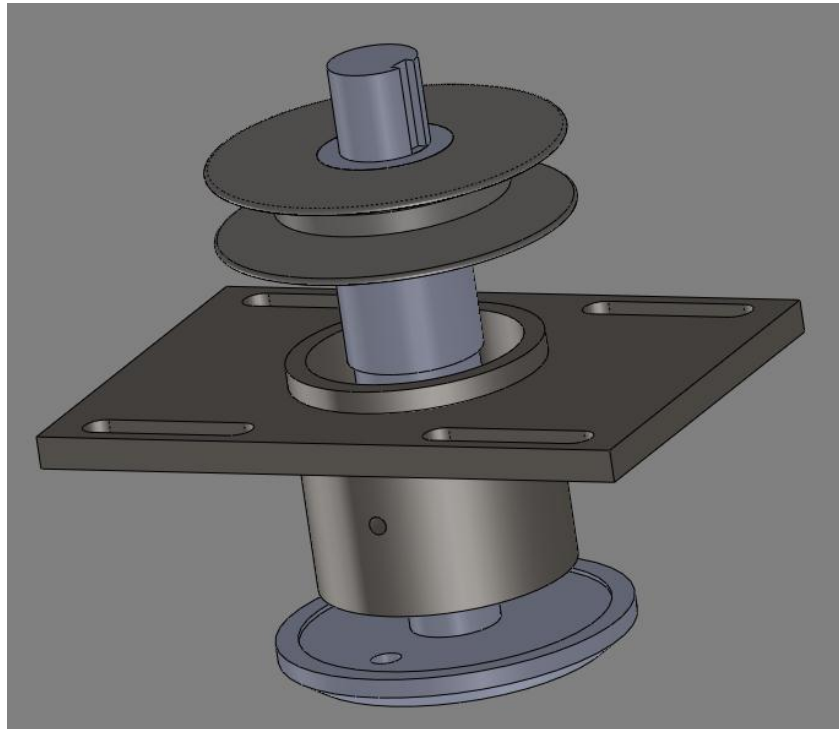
The rendering of the completed bearing carrier includes both the extended drive shaft and tapered roller bearings as mentioned in the above paragraph. This rendering does not include the new Blade shafts. Mechanical drawings of the assembly and components can be found in figures B.2 –B.8 of Appendix B.
